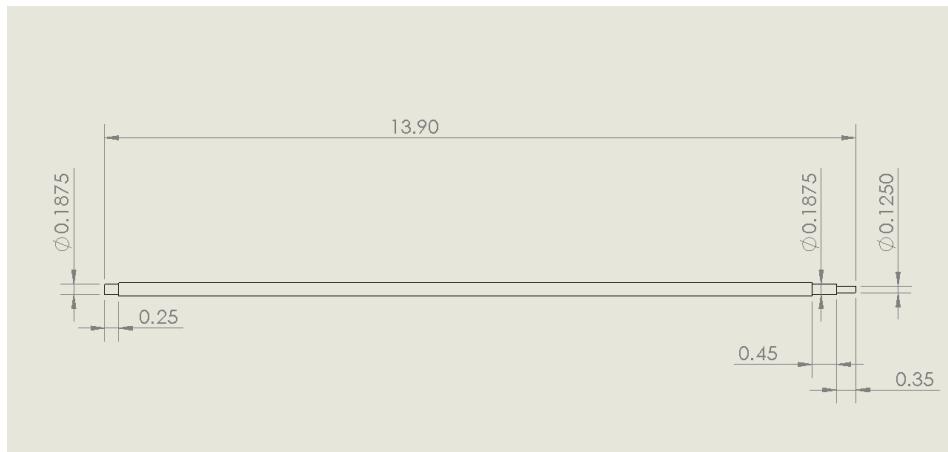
The dimensions of the machined shaft are shown in inches (shaft.SLDDRW).
